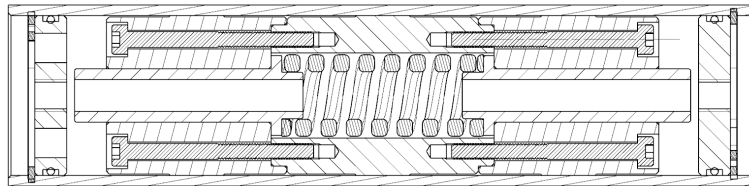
A drawing of the ATVA inside the reciprocating saw.
